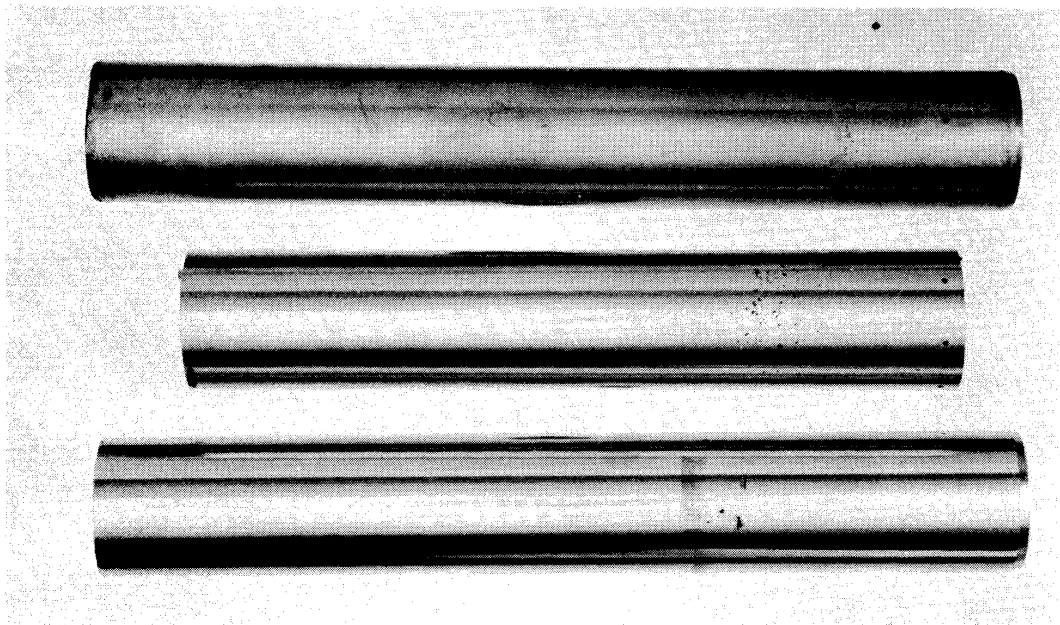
Top to Bottom: service failure, 0.0002-inch-thick chromium plate, sleeve 1; service failure, 0.0010-inch-thick chromium plate, sleeve 2; accelerated test failure, 1% CaCl₂, 1.5 volts, 12 hours, sleeve 9.
